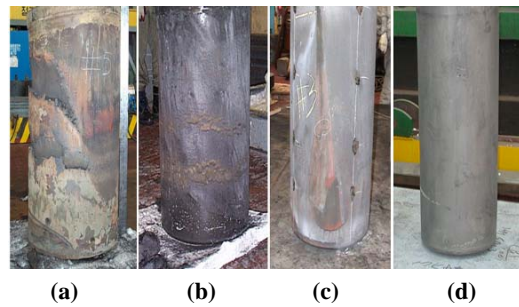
Test forged products, warm die forging (a) without delta glaze, (b)with delta glaze, (c) semi-hot die forging, (d)hot die forging
